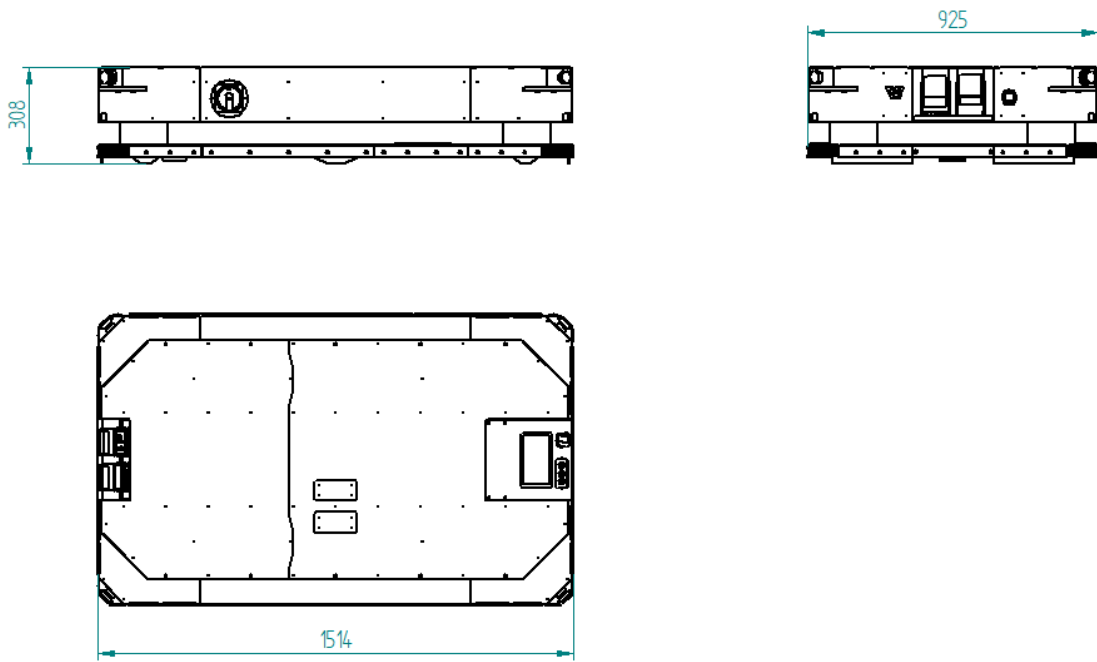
VERSABOT 1500 Dimensions (no attachments)
